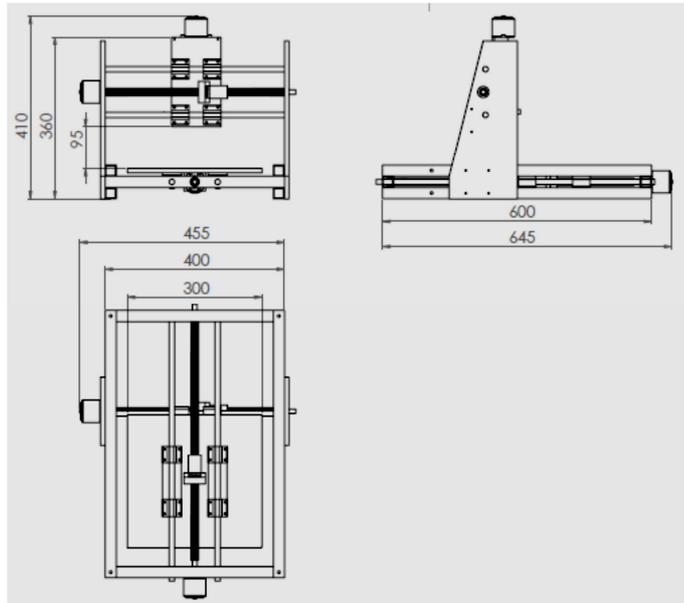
Technical Drawing Measurements of a Three-Axis Mini CNC Machine
